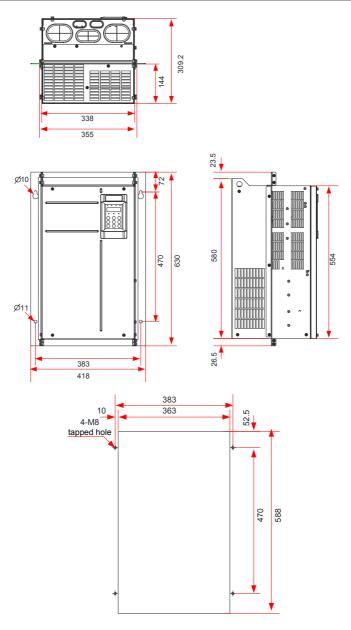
Mounting bracket dimensions and hole spacing for 75–110 kW AC drive models
